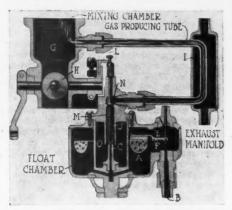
CROSS-SECTION OF CHAMBRAY CARBURETER
